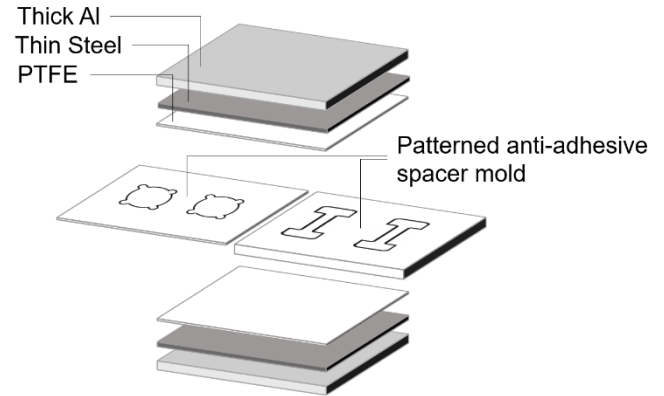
Pressing vessel (Al + Steel) and the sacrificial mold (top/bottom PTFE + custom spacer mold)
